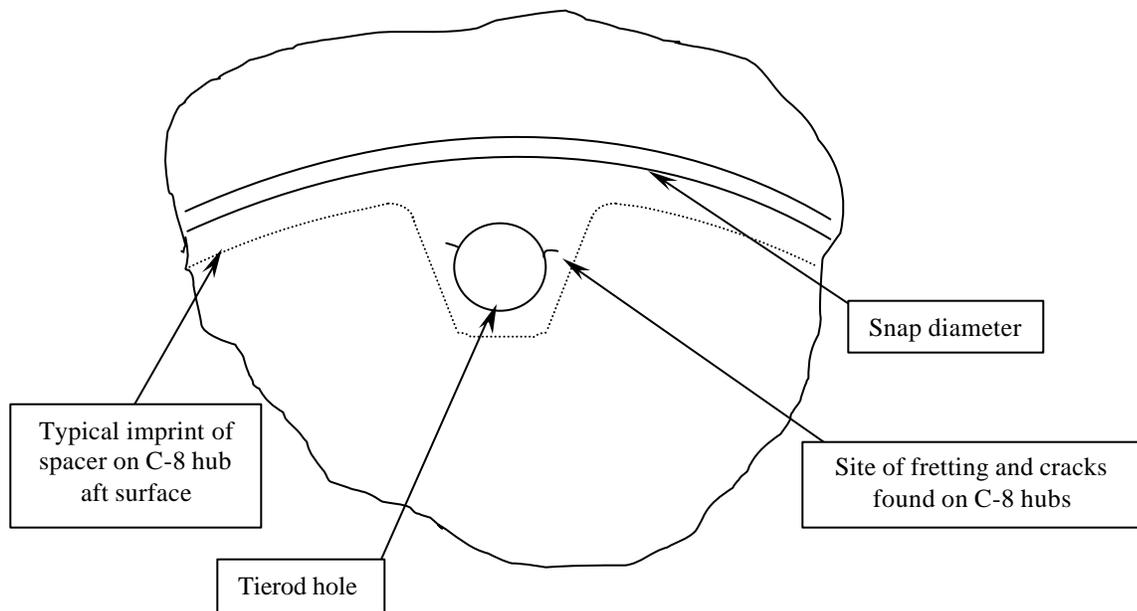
Location of Fretting and Cracks Found on Aft Face of C-8 Hubs
